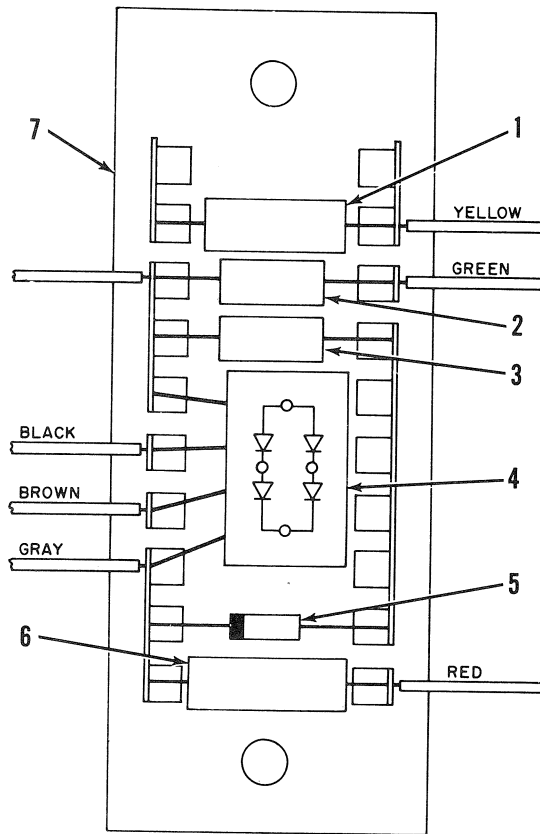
POWER SUPPLY BOARD ASSEMBLY
